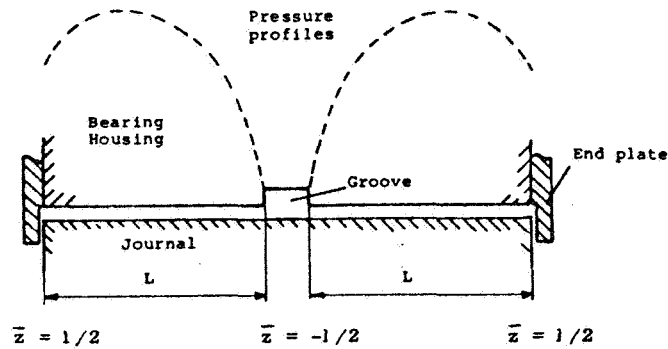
Damper configuration with circumferential oil supply groove and end plates
